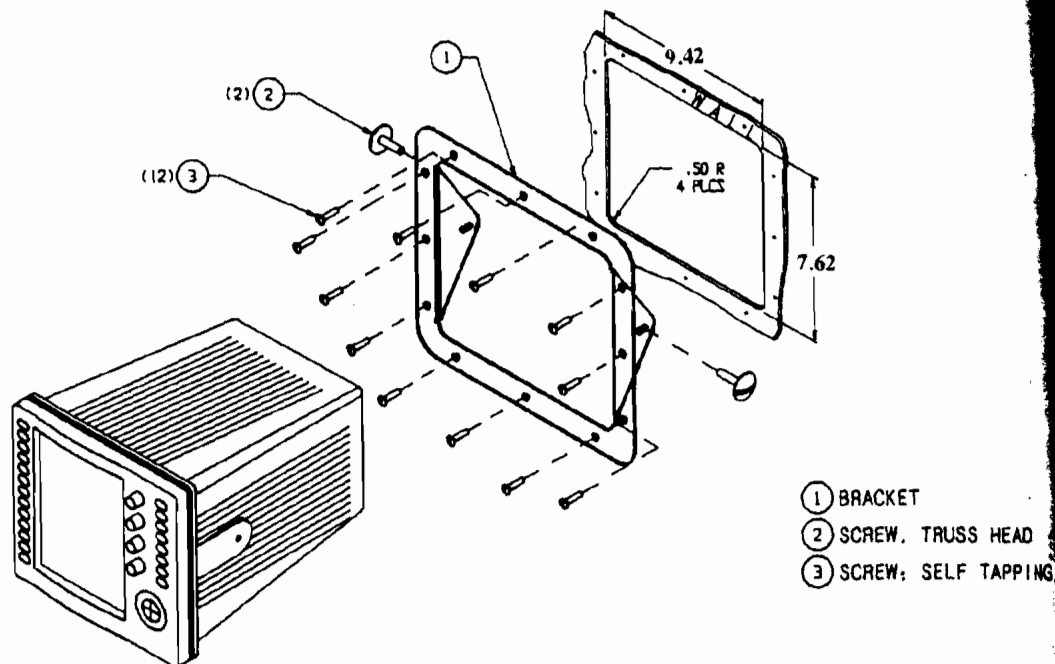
CONSOLE MOUNTING THE DISPLAY
